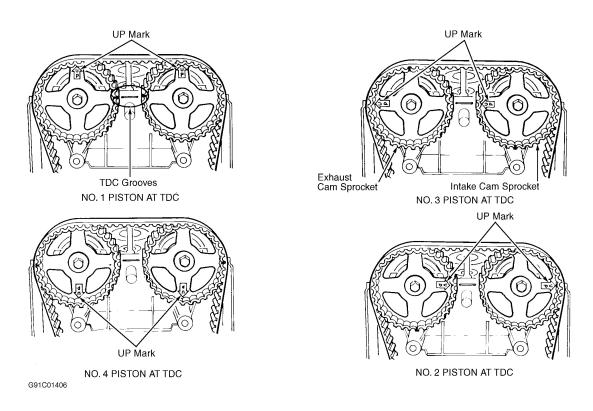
Positioning Camshafts For Valve Clearance Adjustment Courtesy of AMERICAN HONDA MOTOR CO., INC.
